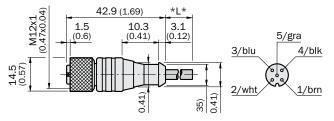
Cable socket, M12, 5-pin, straight, with cable
